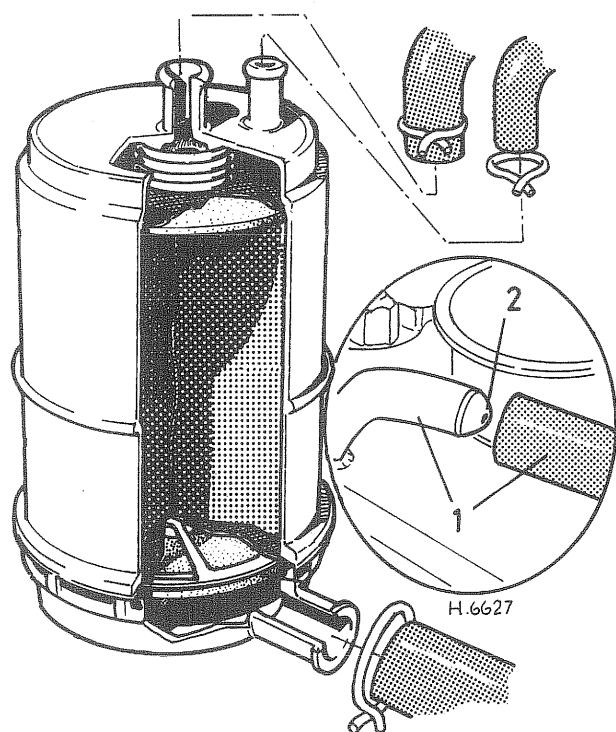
Sectional view of the charcoal canister (Sec 38)
